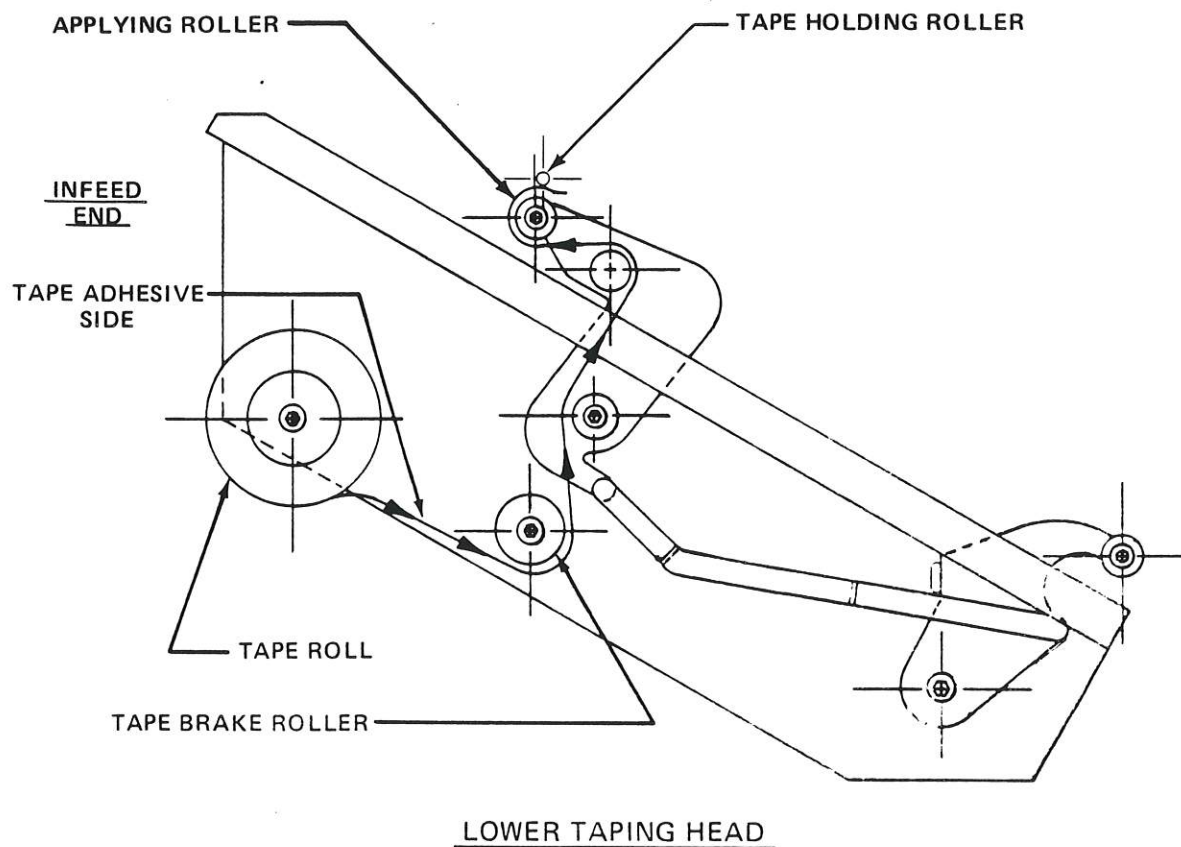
B - TAPE THREADING DIAGRAM - RIGHT SIDE VIEW
